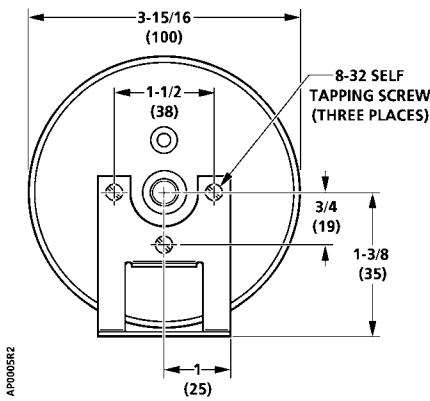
No. 3 Actuator with Pivot Mounting Bracket Dimensions. Dimensions are in Inches (Millimeters).
